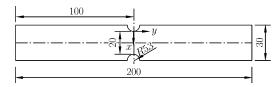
Smooth LC4 specimen geometry (dimensions in mm).
